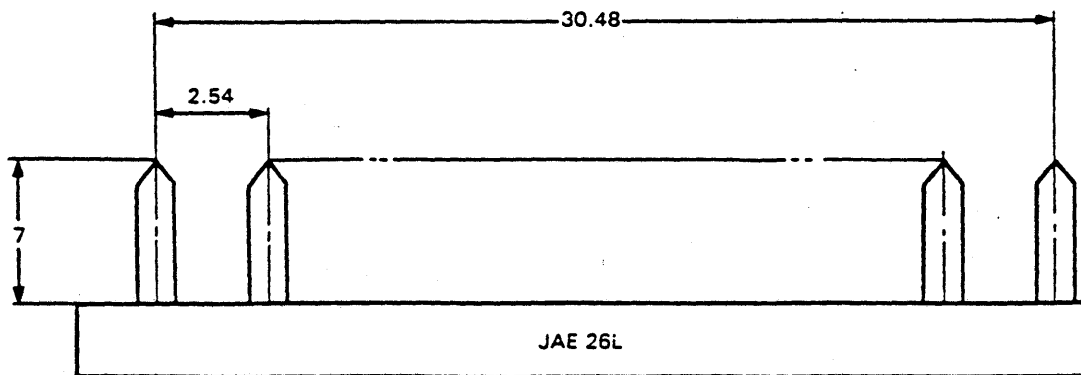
CN109 CONNECTOR DIMENSIONS
